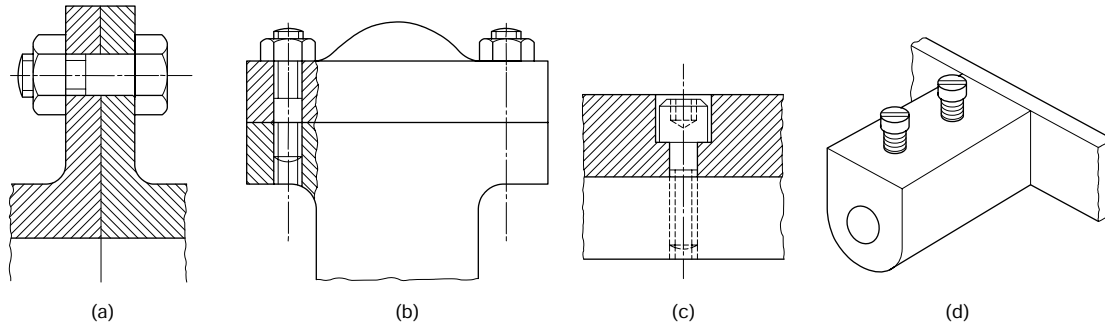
Use of screwed fastenings: (a) section through a bolted joint – plain shank extends beyond joint face; (b) stud and nut fixing for an inspection cover – this type of fixing is used where a joint has to be regularly dismantled; the bulk of the wear comes on the stud, which can be eventually replaced cheaply which prevents the wear falling on the expensive casting or forging; (c) cap head socket screw – although much more expensive than an ordinary hexagon head bolt, the socket screw is made from high tensile alloy steel, heat treated to make it very strong, tough and wear resistant; socket screws are widely used in the manufacture of machine tools and this example shows how the head may be sunk into a counterbore to provide a flush surface; (d) cheese head brass screws – these are used in small electrical appliances for clamping cables into terminals
